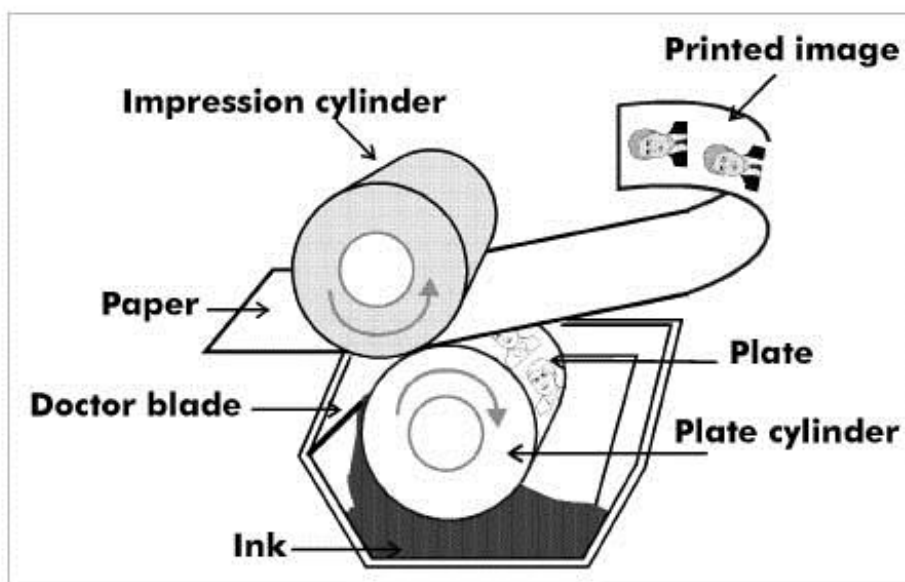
Gravure printing. Reprinted from Illinois Sustainable Technology Center (2015) [89].
